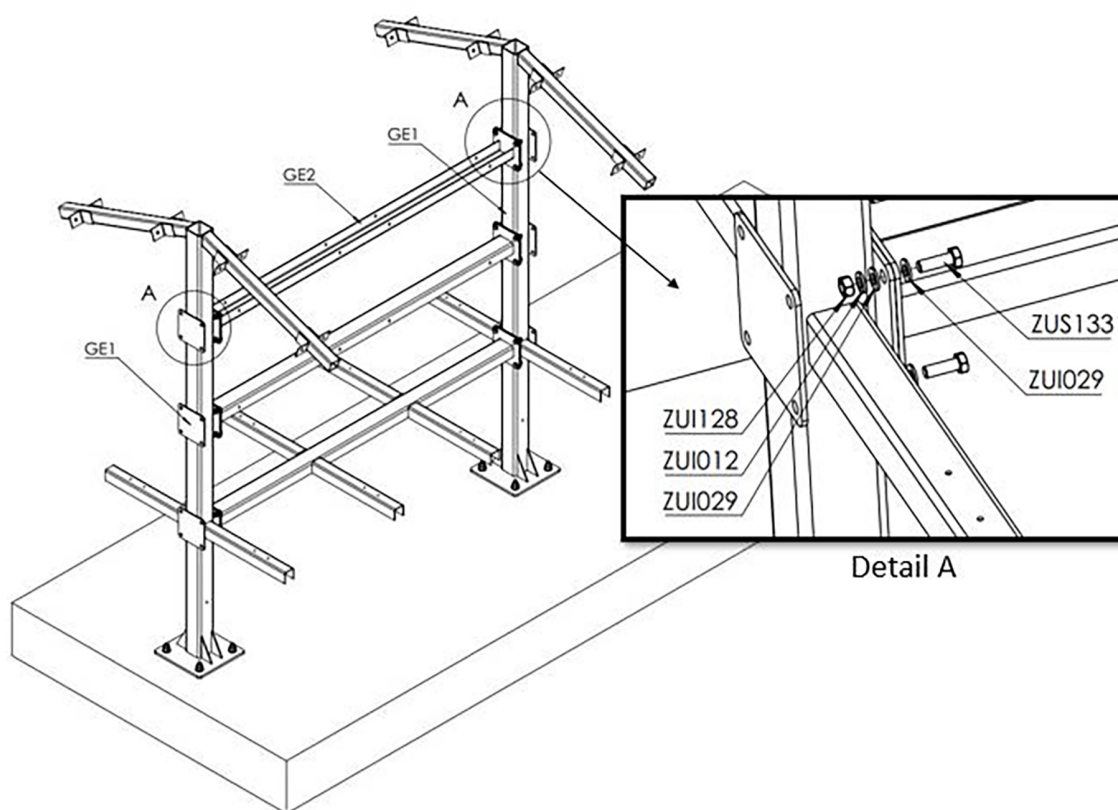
Assembly — Inverter rack — GE2-2, GE1 (detailed view)
